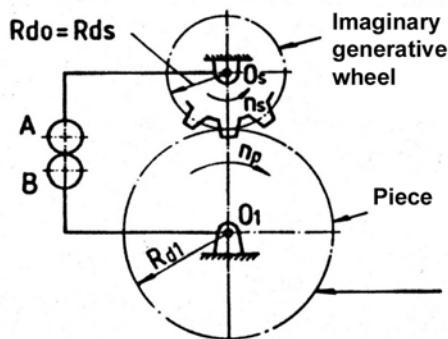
Kinematic rolling chain of wheel gears mortising machines.
